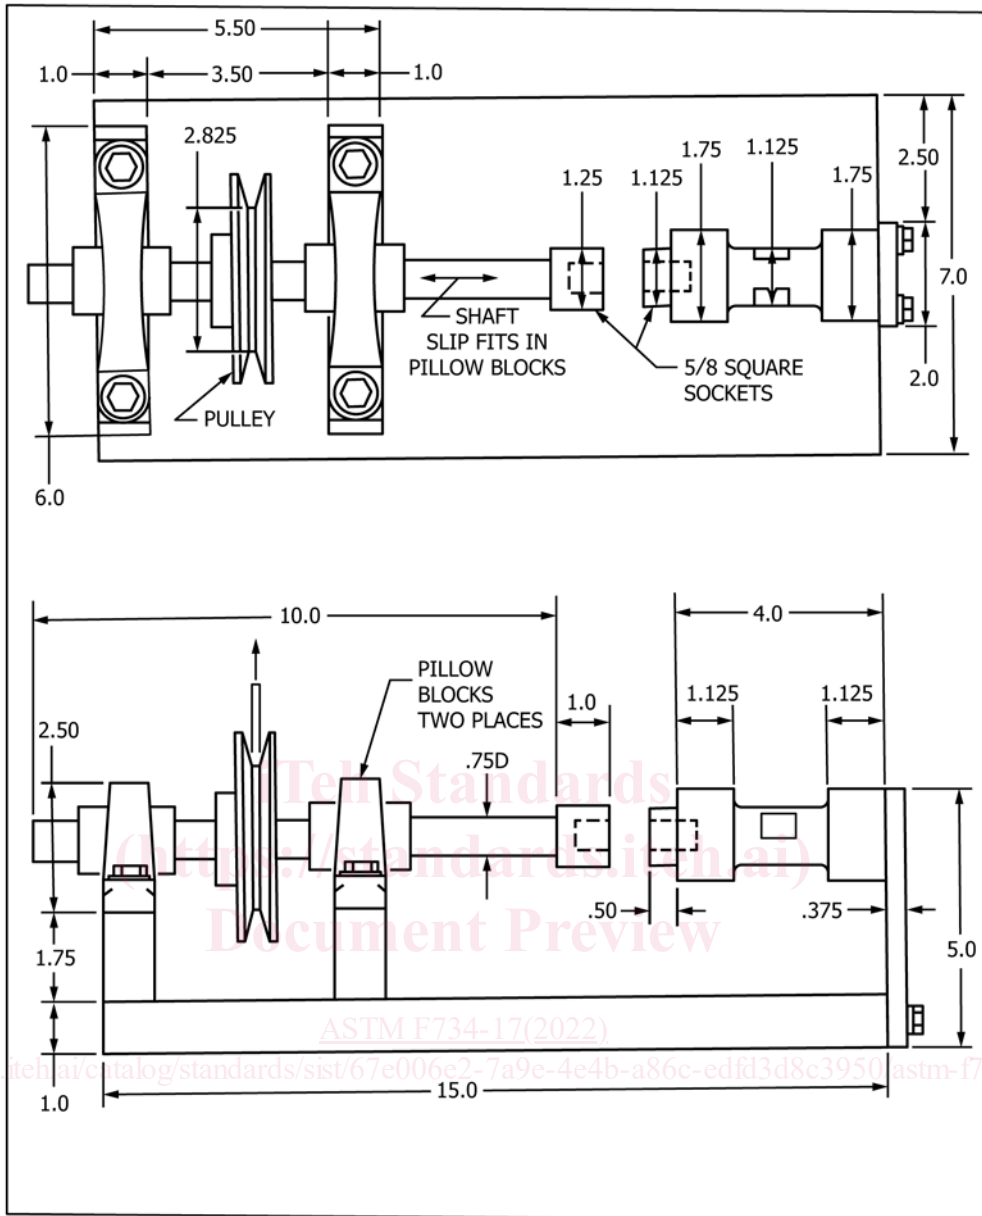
Torsional Shear Test Fixture (All Dimensions in Inches)
